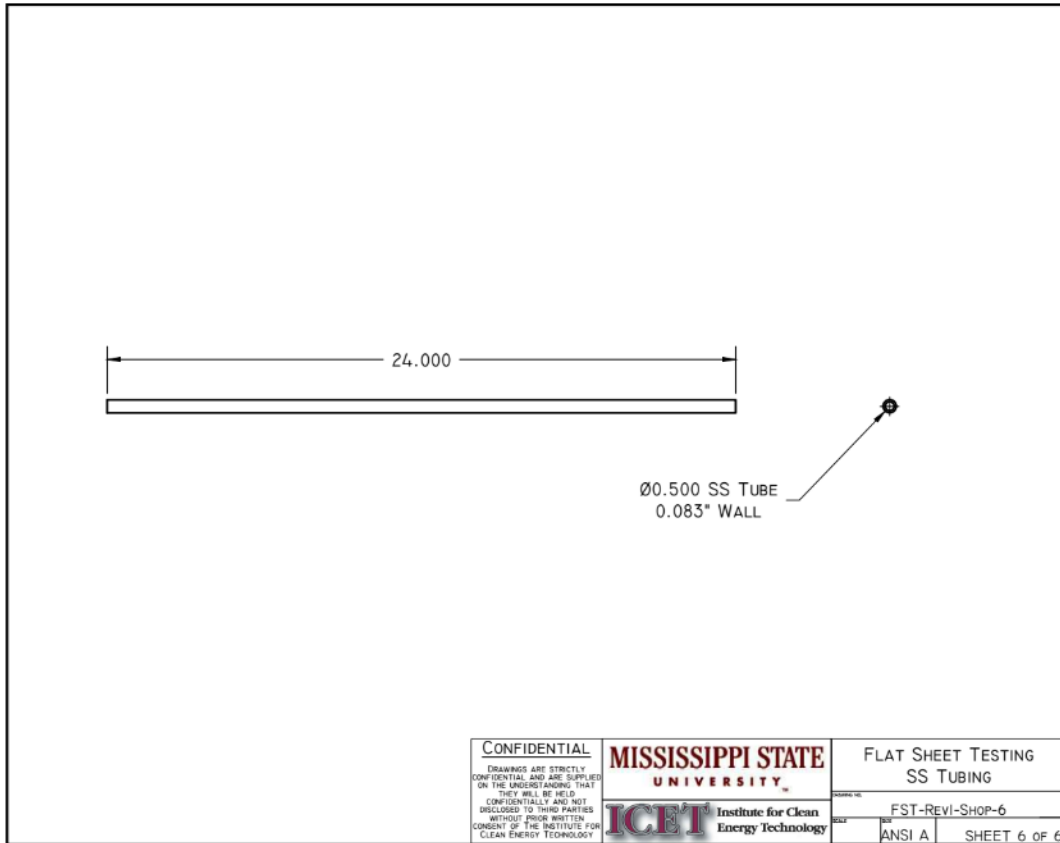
CAD drawing of the stainless steel isokinetic sampler sampling stem.
